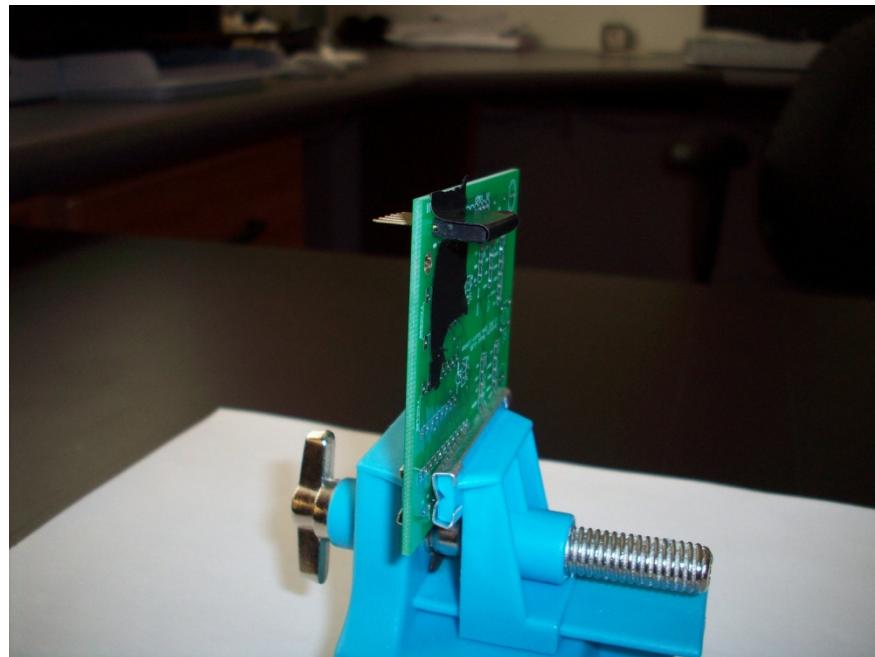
Using Electrical Tape to Hold Connectors in Place.
